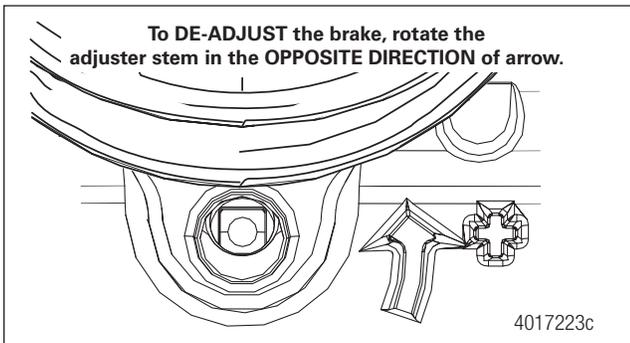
Adjustment Arrow Cast into the Caliper Housing (RH)
